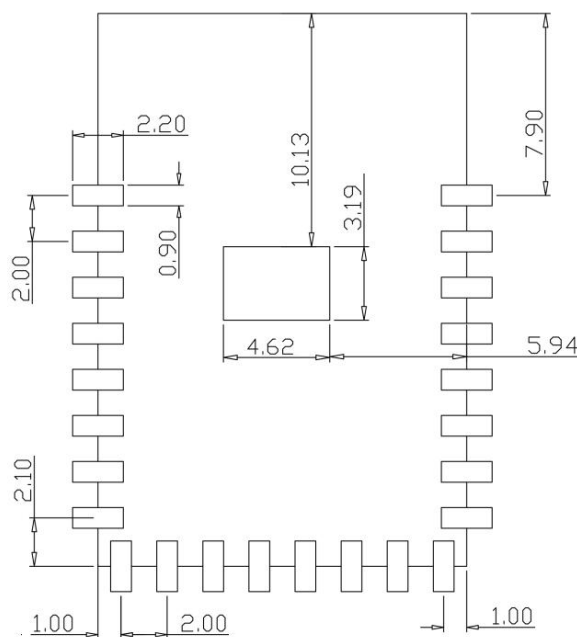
Recommended PCB Footprint Dimensions (Unit: mm)
